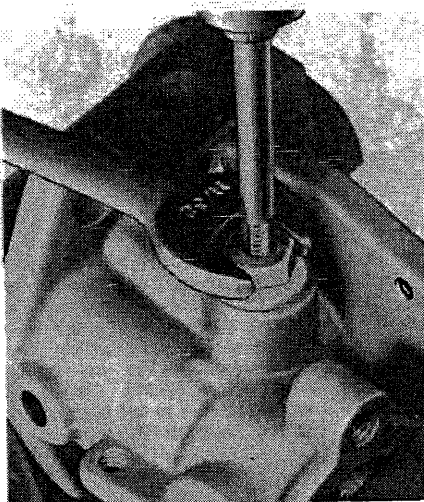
The 8-32 tap can be used as a puller to remove the outlet check valve from early fuel pump carburetors.
